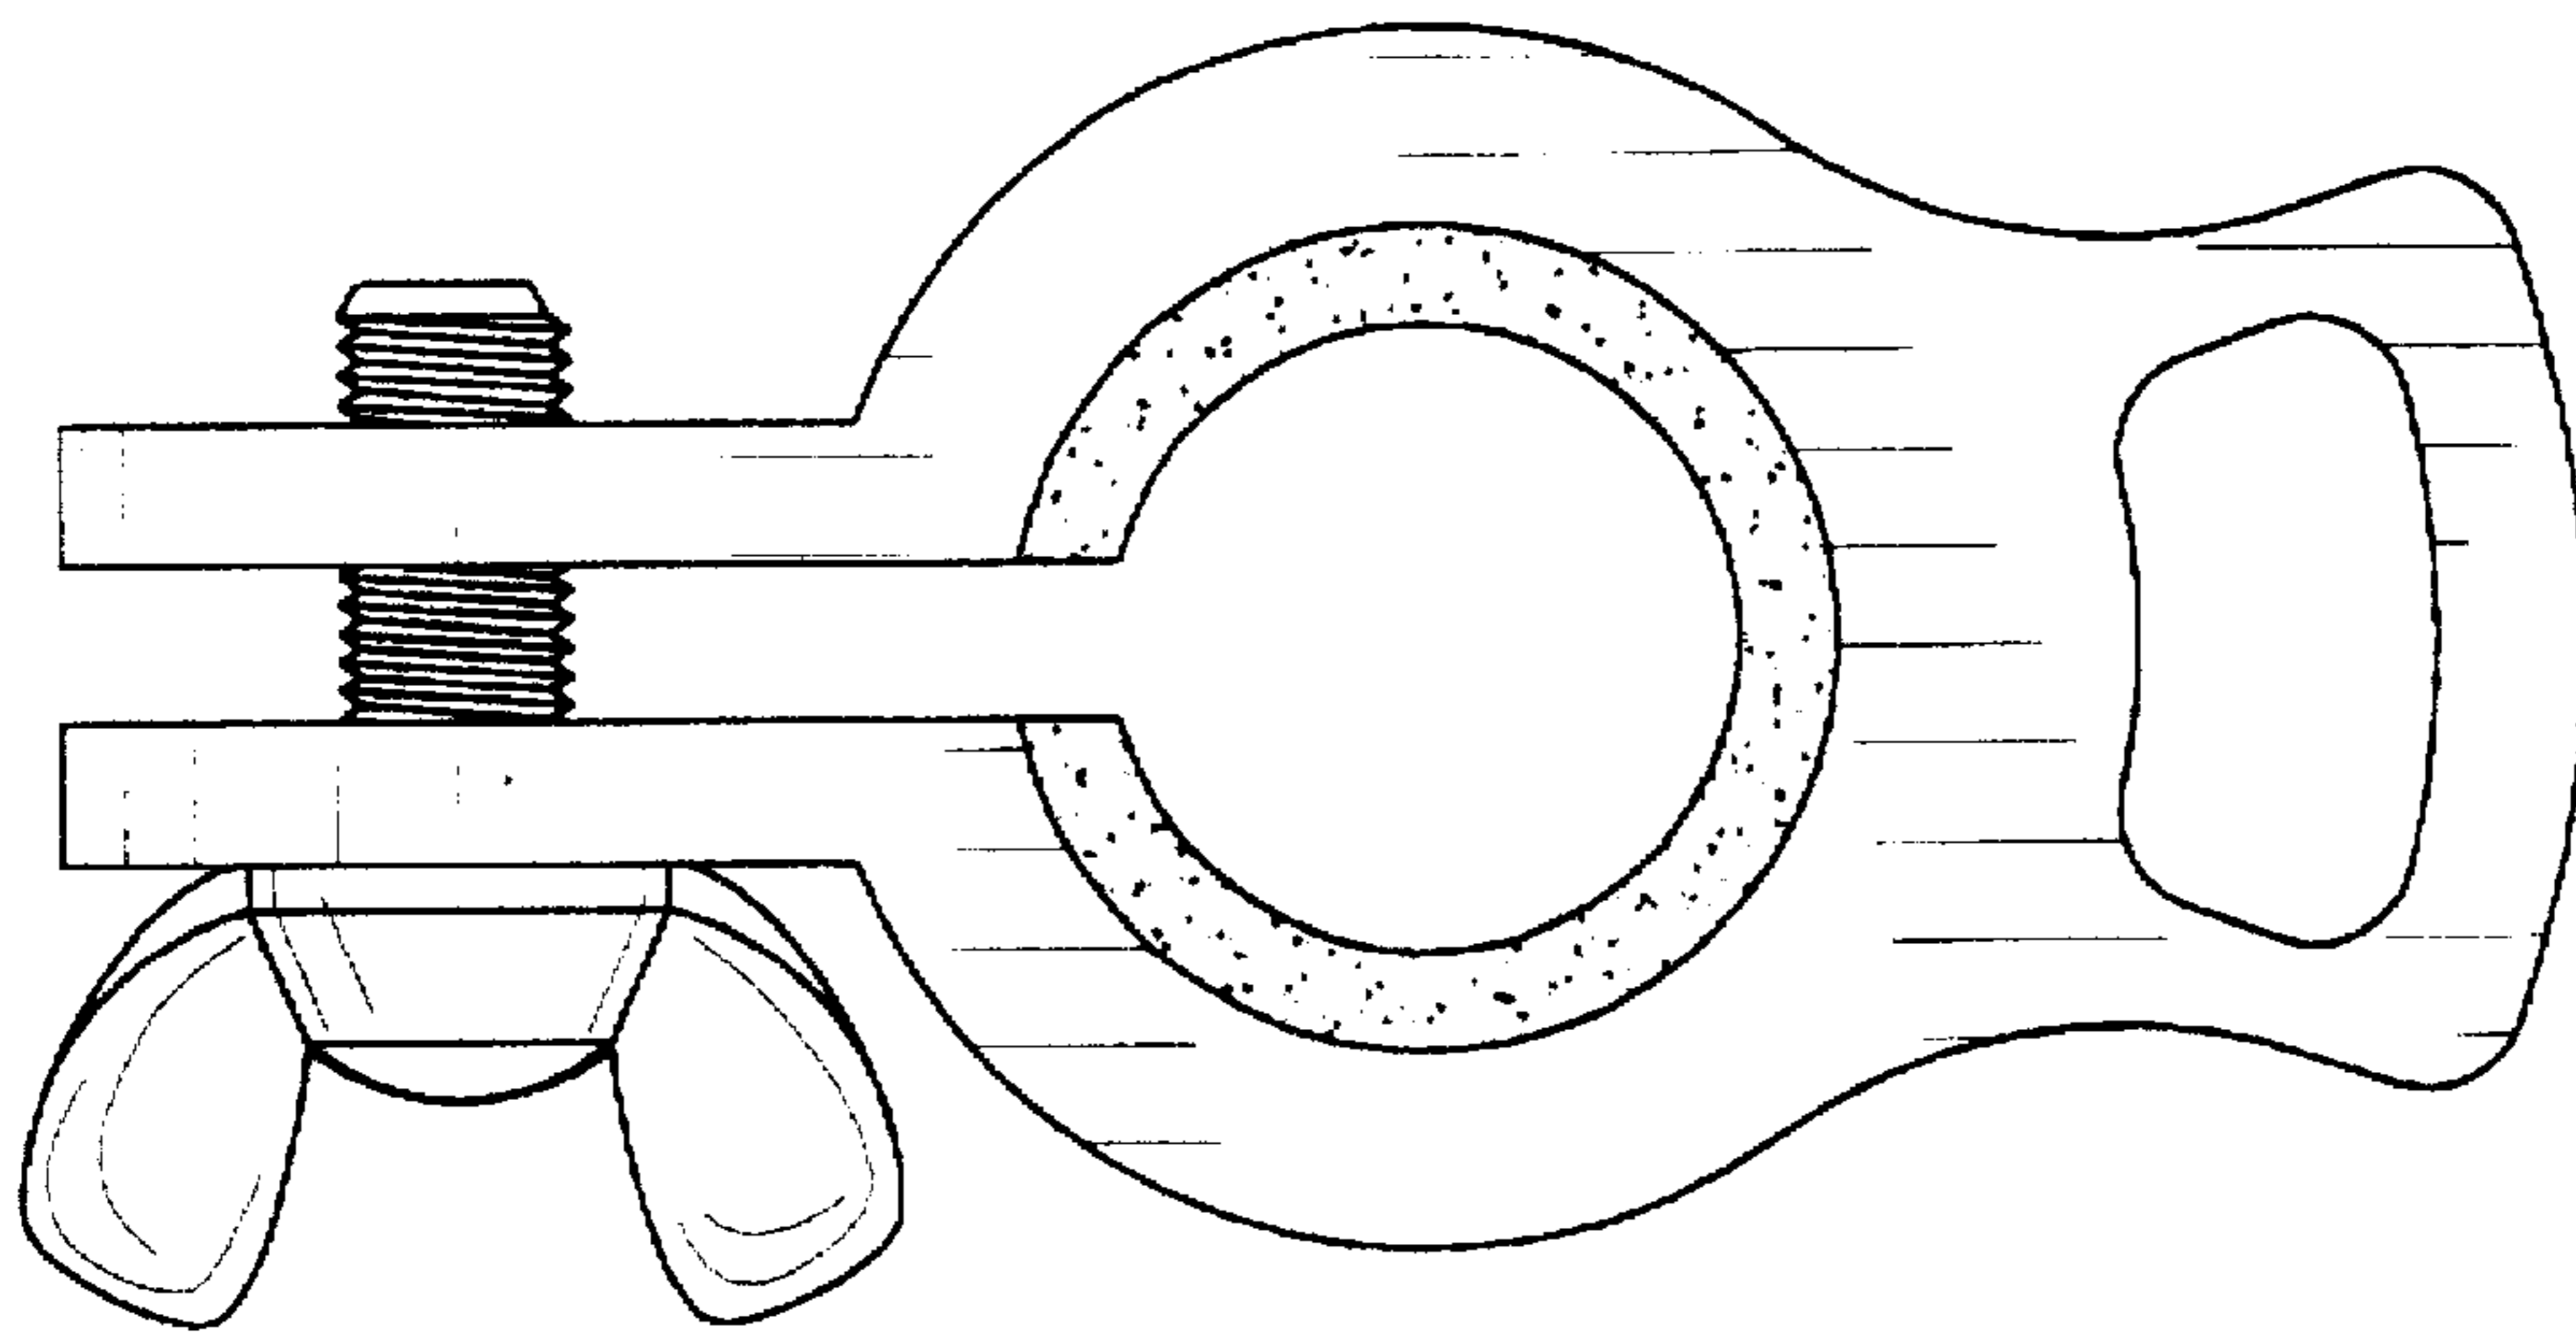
is a right side elevational view of the catheter pole attachment of FIG. 1;
